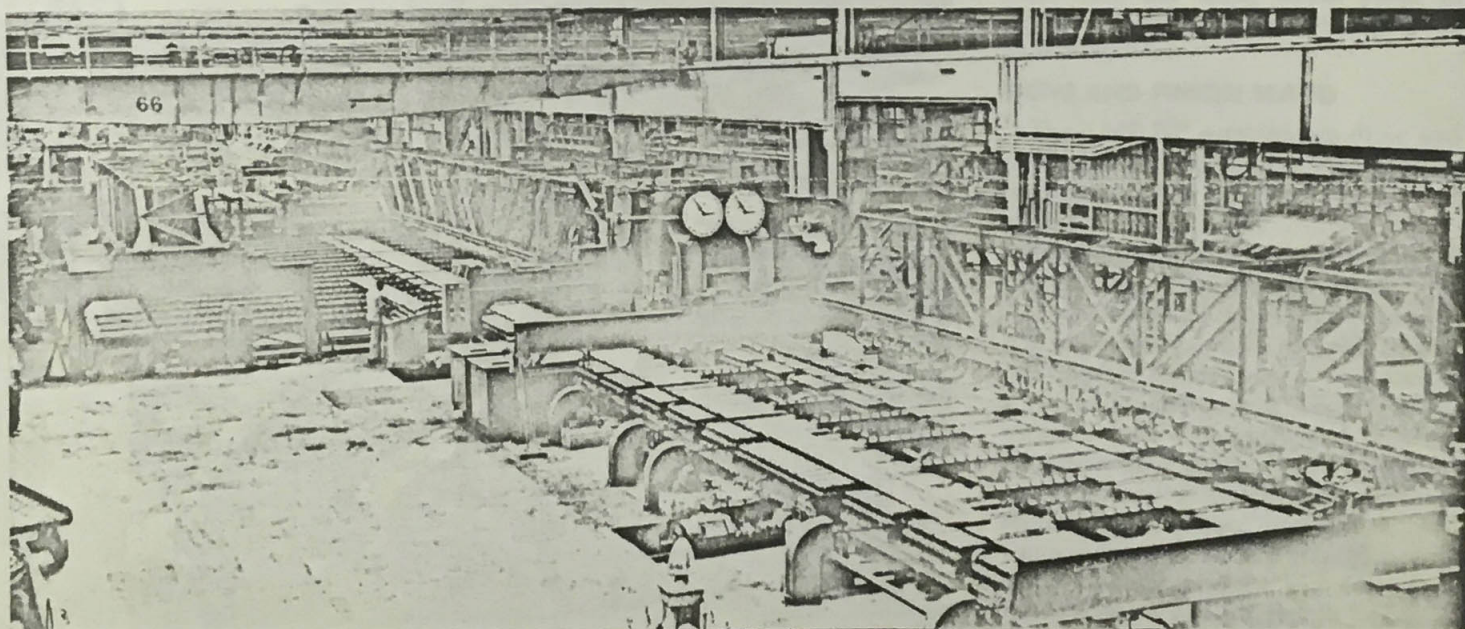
All operating controls of this 30" x 36" cold brass breakdown mill and its completely mechanized handling equipment are centralized at two control desks.
